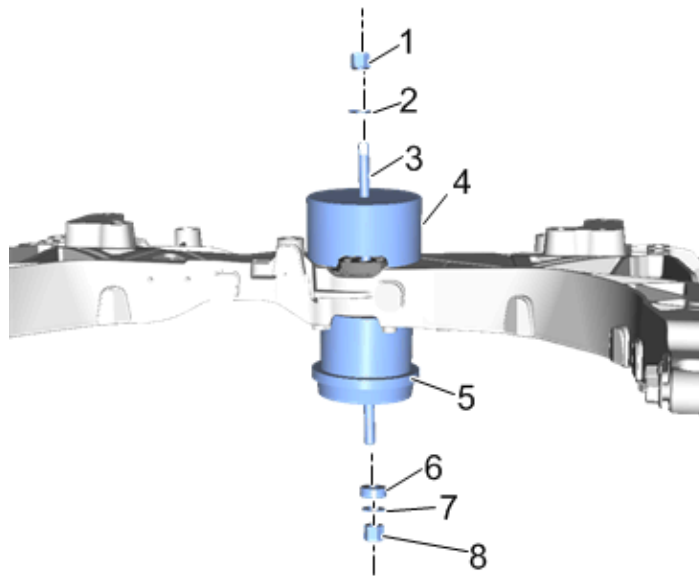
Volt Cradle Bushing Remover/Installer Components
